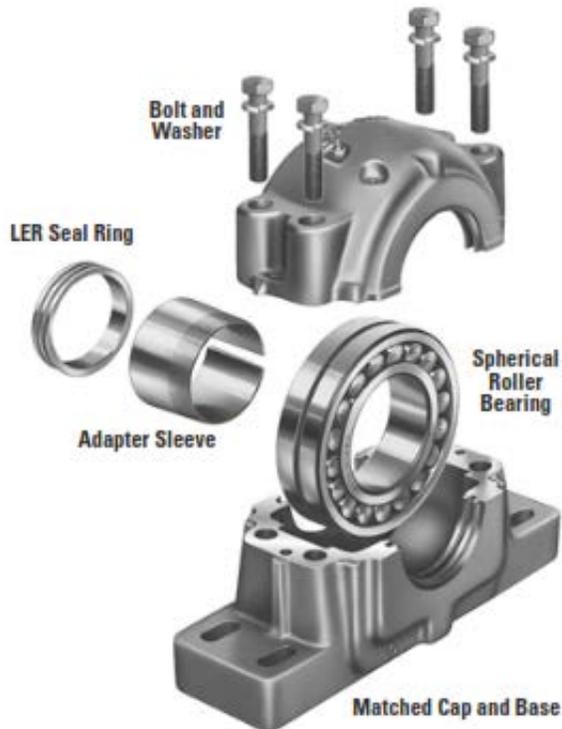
A roller bearing pillow block with its bearing cap removed (Image Credit: Torrington)
